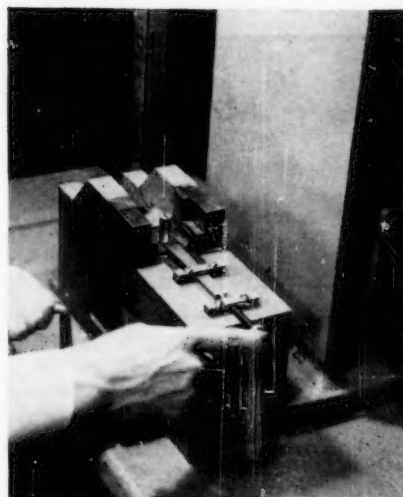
A Guide for Positioning Izod Test Specimens.
